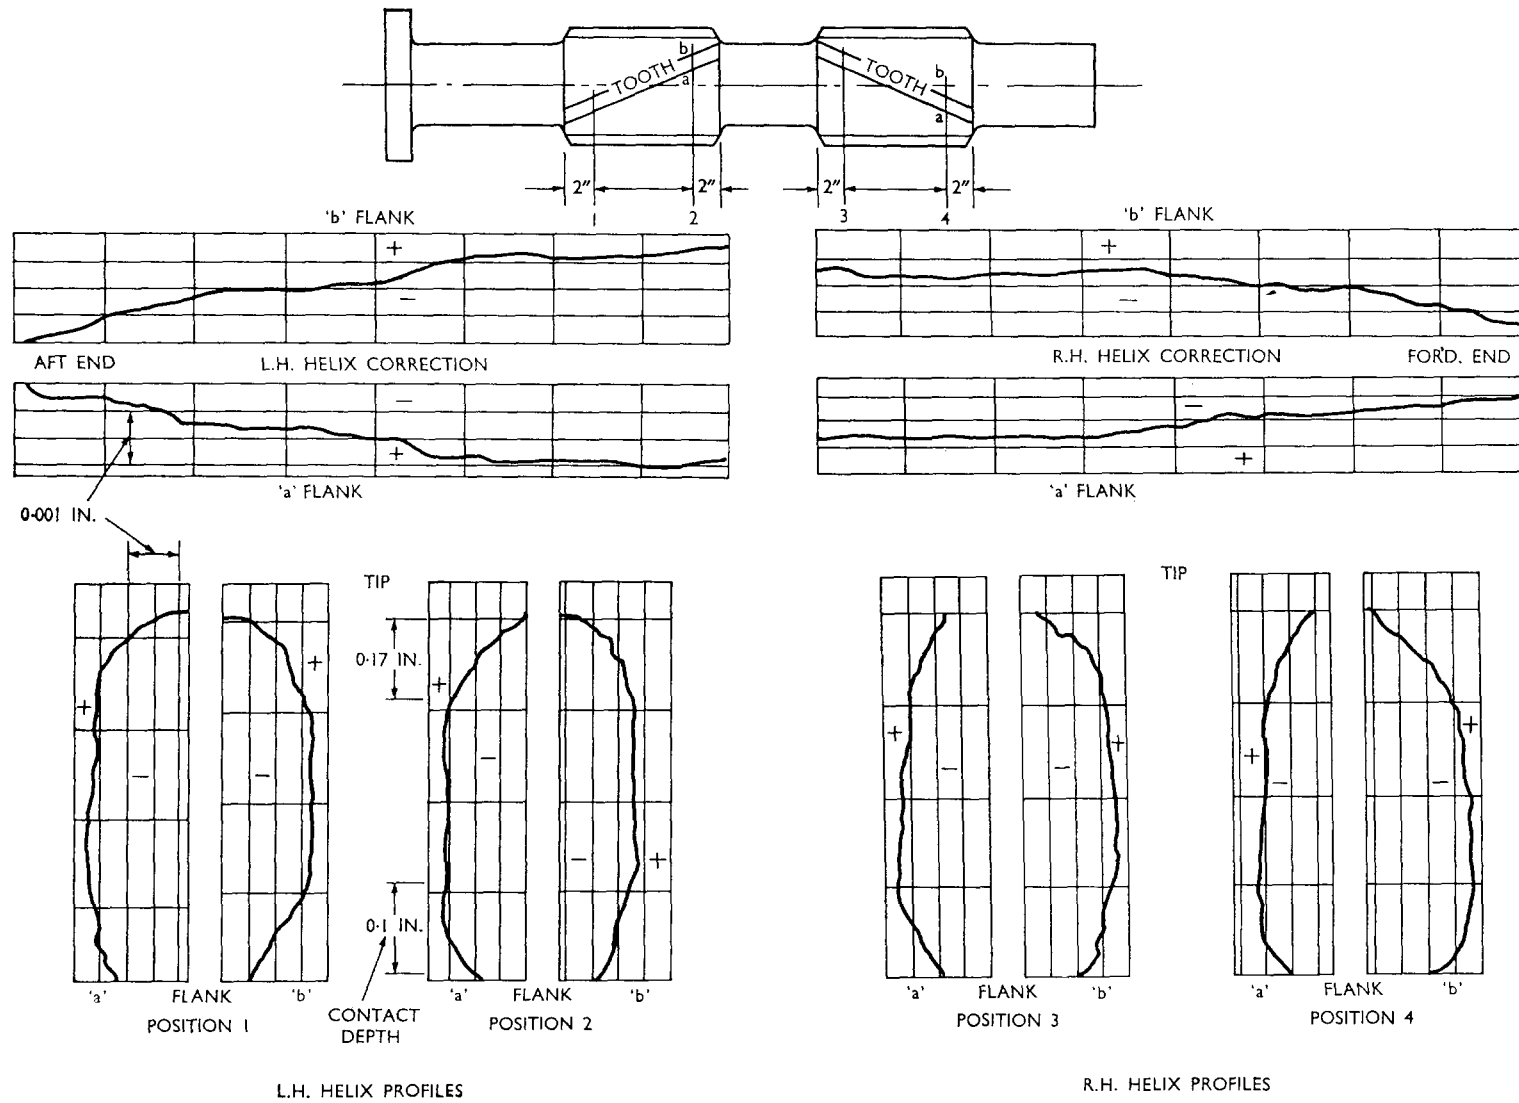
Y.100 GEARS—RECORDS OF SECONDARY PINION TOOTH PROFILES AND HELIX CORRECTIONS AFTER GRINDING
